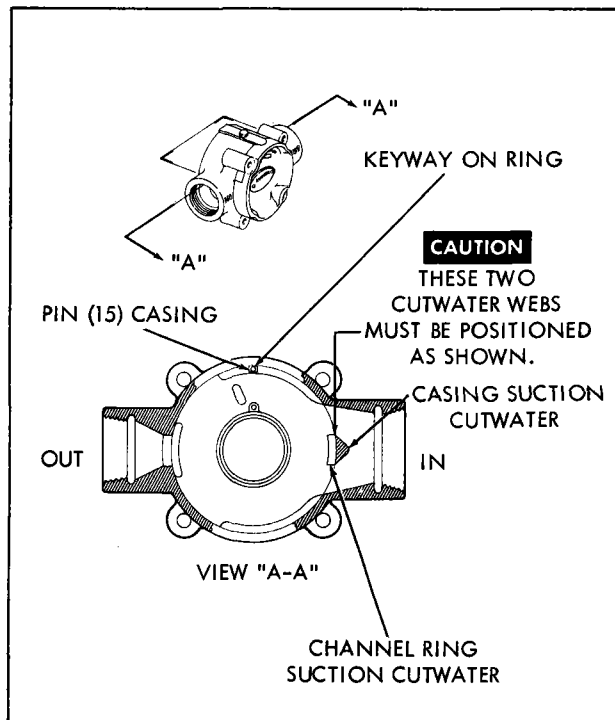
Model 134-135 Installing Inner and Outer Rings in Casing
